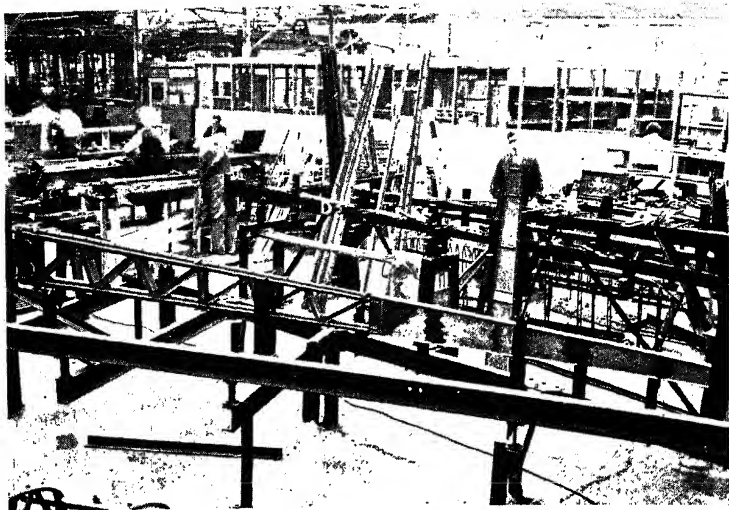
THE SINGLE WING SPAR JIGGED FOR ASSEMBLY.
